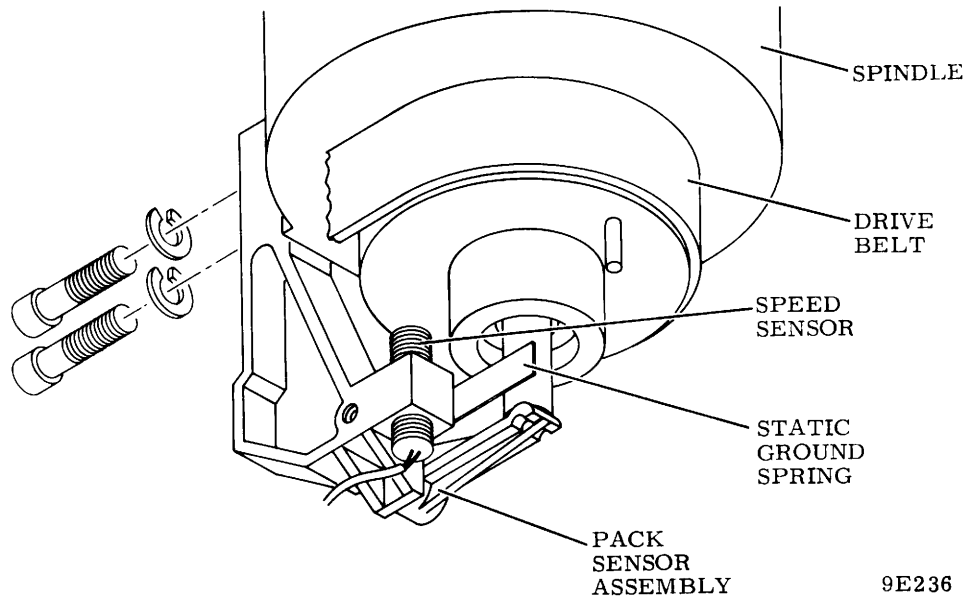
Pack Sensor Assembly Replacement (S/C 09 and Above)
